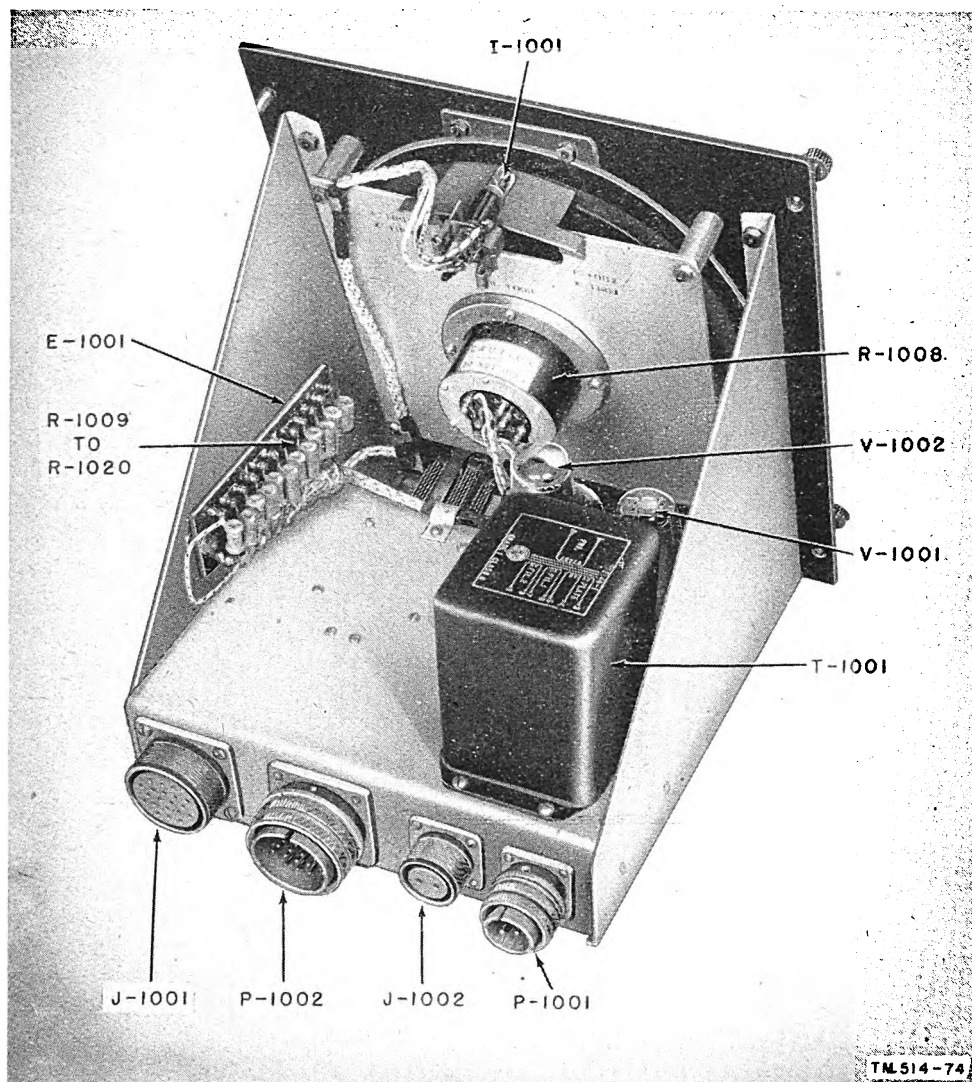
Azimuth Indicator ID-240/CRD-2, top view of chassis, parts location.
